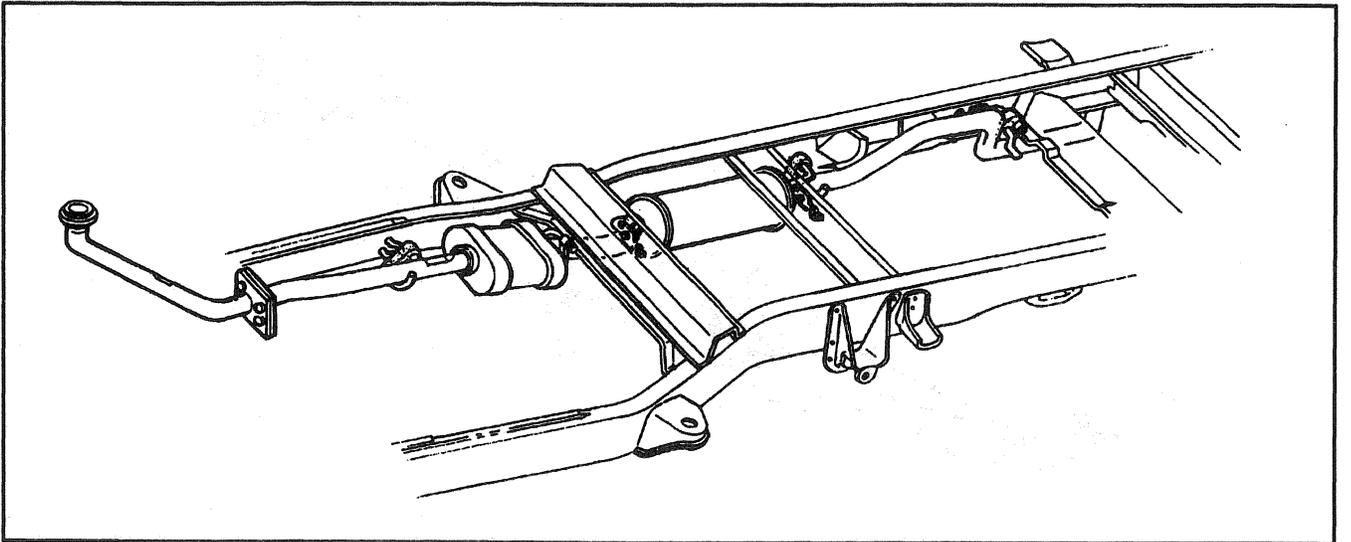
Exhaust System - C/K 310 Cab Chassis w/6.5L Diesel Engine under 15,000 GVW
